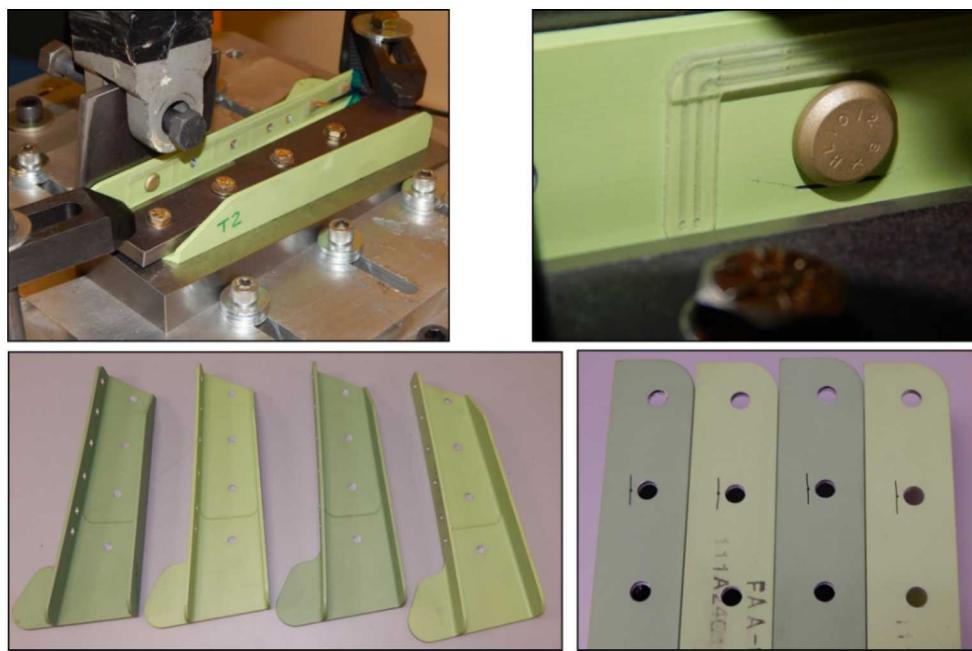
CVM Wing Box Fitting Test Specimens with Sensors Installed and Mounted in Fatigue Test Fixtures
